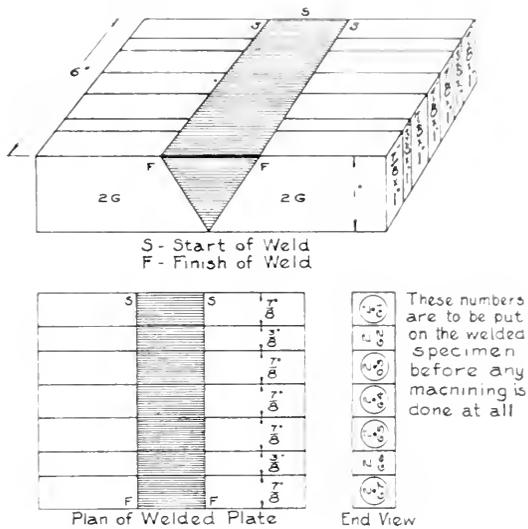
Layout of Welded Specimen preparatory to Machining the Test Bars
